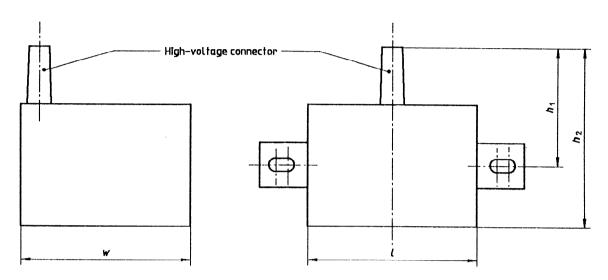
FeOverall dimensions of Ignition coil with mounting brackets
